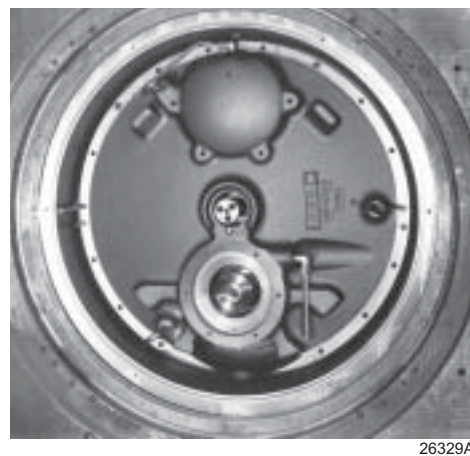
ALL FRONT END BEARINGS REMOVED
